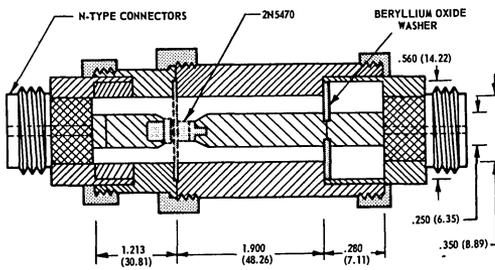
Suggested Test Fixture for Test Set-Up Shown in Fig. 5.
